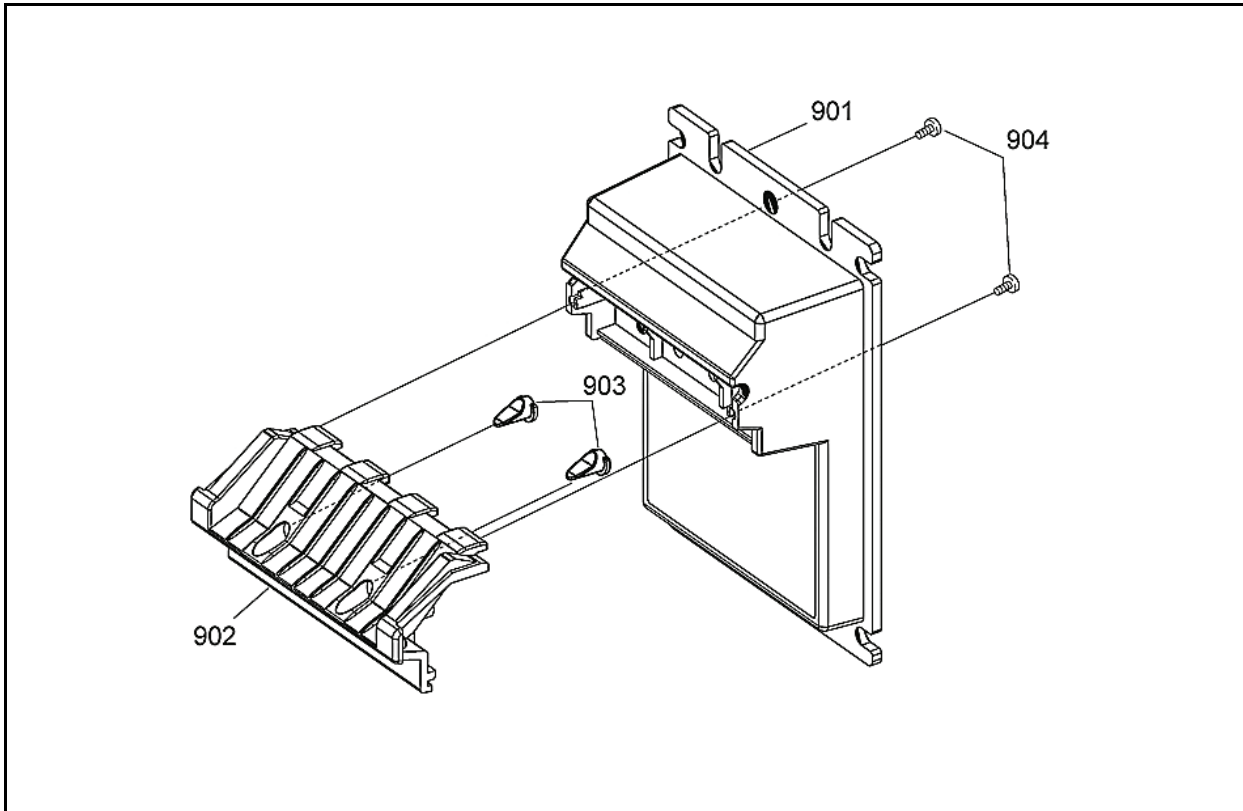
Euro SD-Type Faceplate Assembly Exploded View
